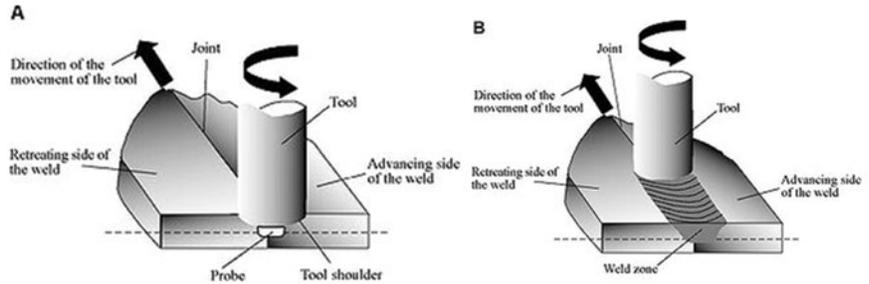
Schematic diagram of the FSW process: (A) Two discrete metal work-pieces butted together, along with the tool (with a probe). (B) The progress of the tool through the joint, also showing the weld zone and the region affected by the tool shoulder.
